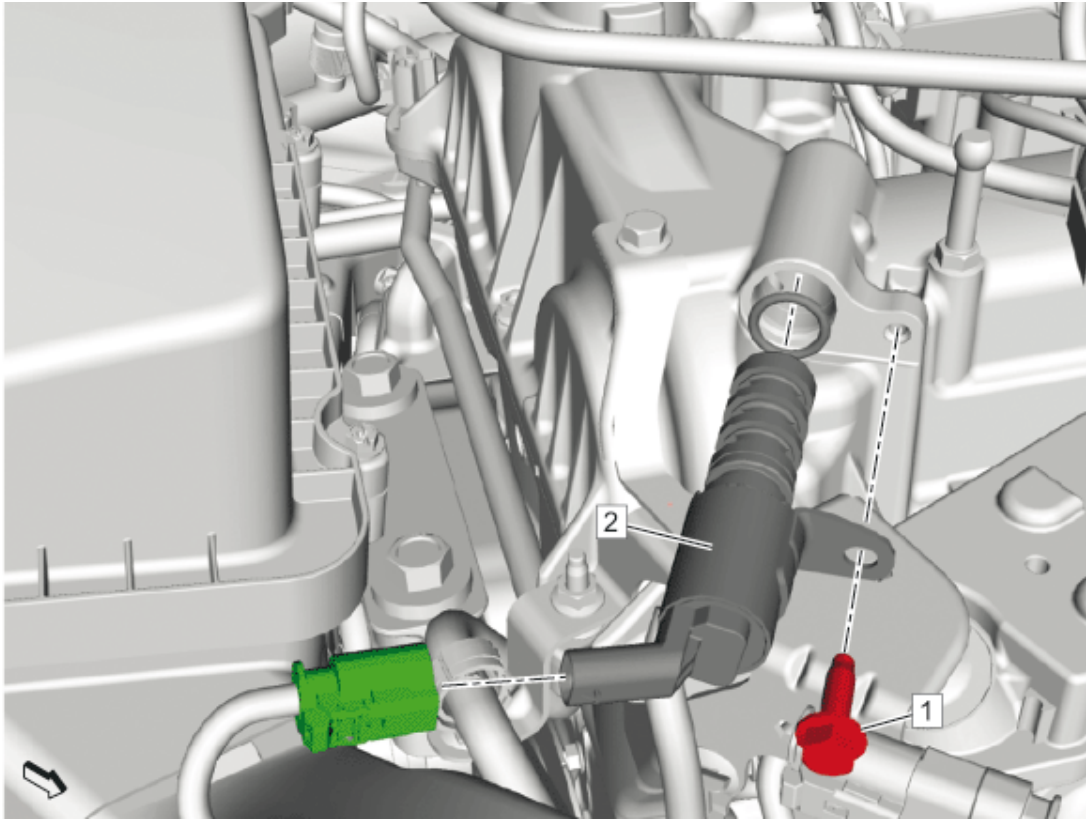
Camshaft Position Actuator Solenoid Valve - Exhaust
